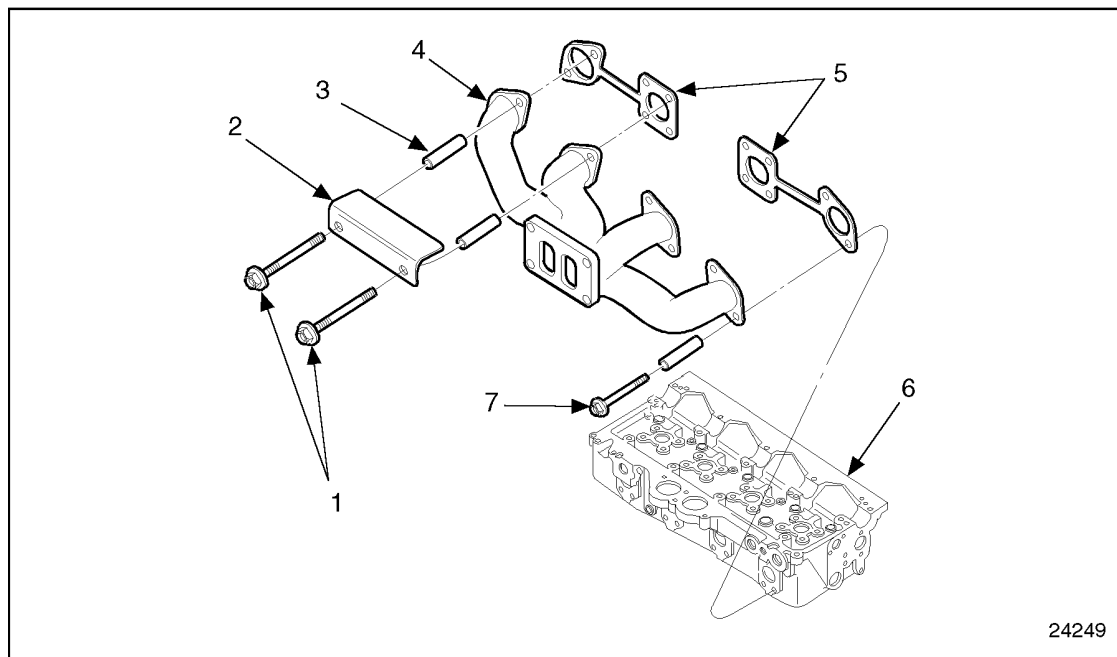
Exhaust Manifold Gaskets and Related Parts
